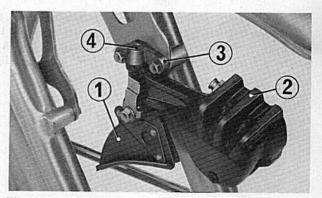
(1) Caliper pin (2) Caliper joint (3) Caliper body
